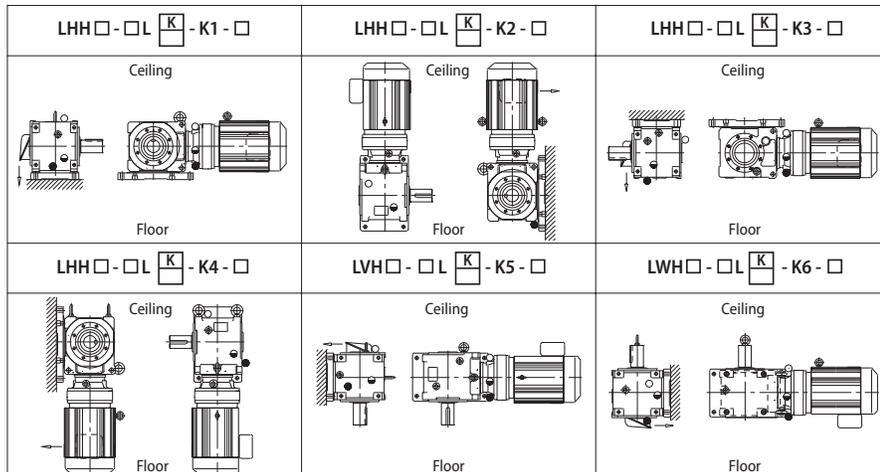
Solid Output Shaft Right (R) – Output Flange Left
